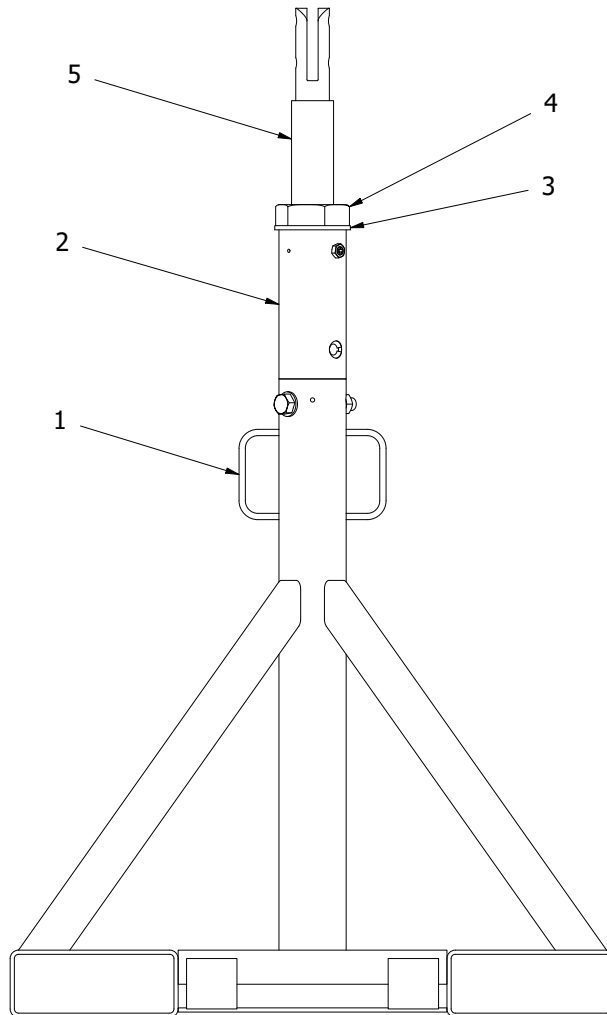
Pedestal Assembly, 46 7/8" Height
